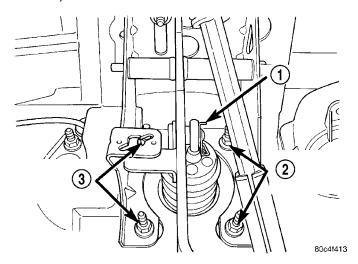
Brake Booster Mounting Nuts and Rod Retaining Clip
